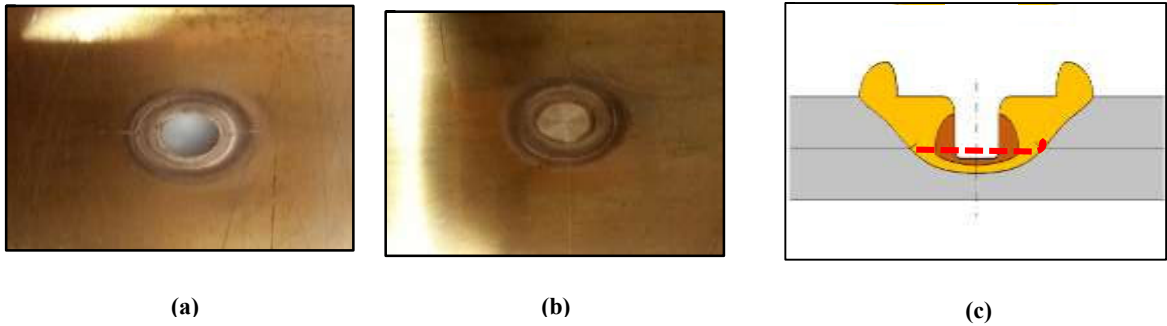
Shear Fracture Mode (a) Bottom View of The Upper Sheet, (b) Top View of the Lower Sheet, and (c) Shear Fracture Mechanism
